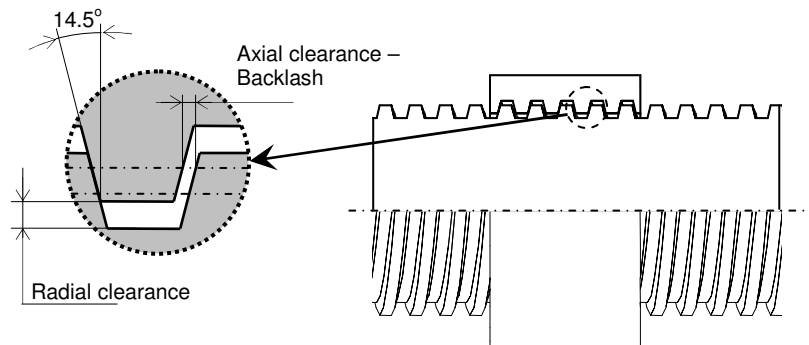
Meshing “Stub Acme” lead screw and nut (cut view). Detail: radial and axial clearances
